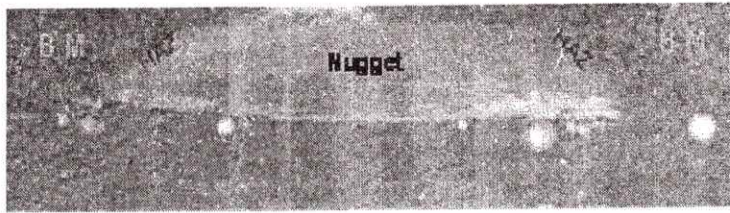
c) macro weld cross-section of AL6061 at (1400 r.p.m),4mm/min
